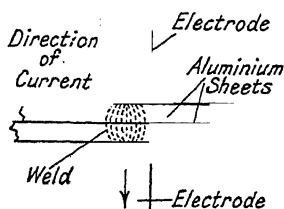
THE THEORY OF SPOT WELDING
